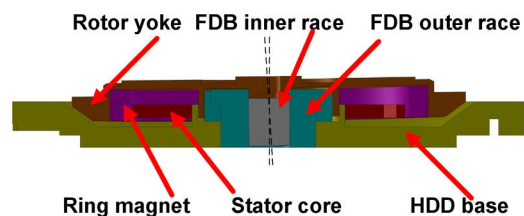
Startup condition of spindle motor with FDB in hard disk.
